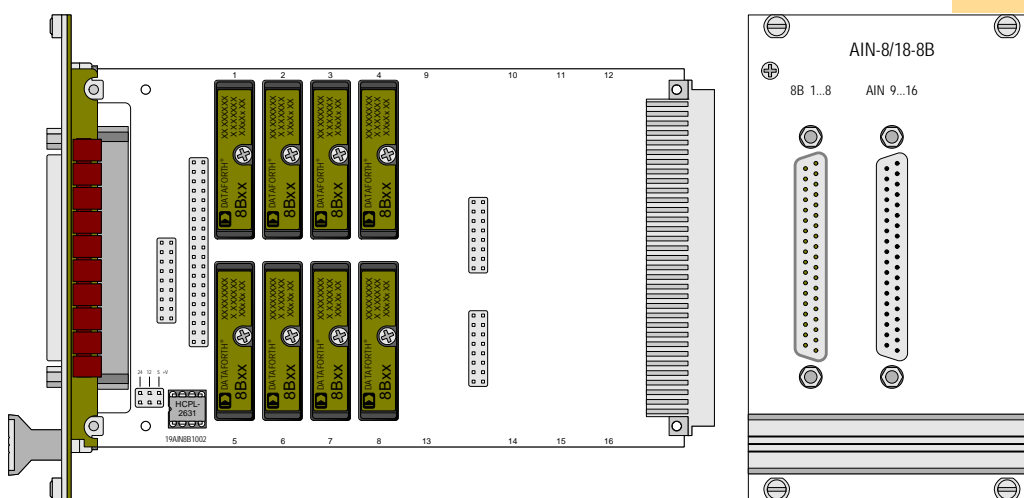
Pro II-AIn-8/18-8B Rev. E: Board and front panel
